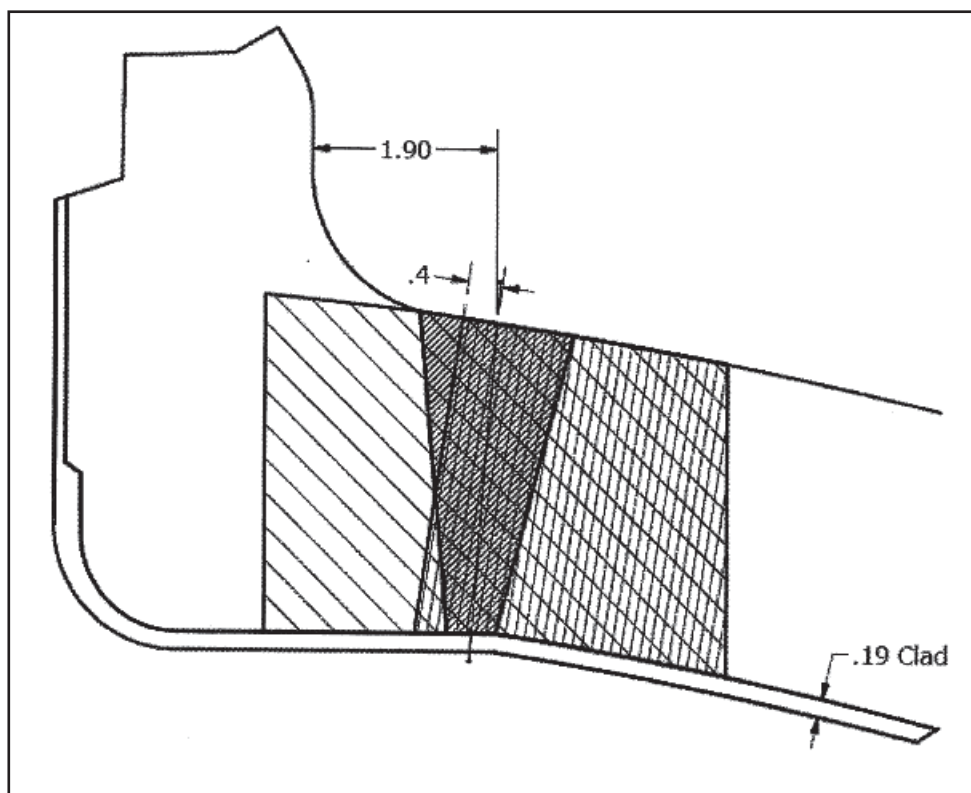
Weld WP-11, 45° &amp; 60° CW-CCW Scans
